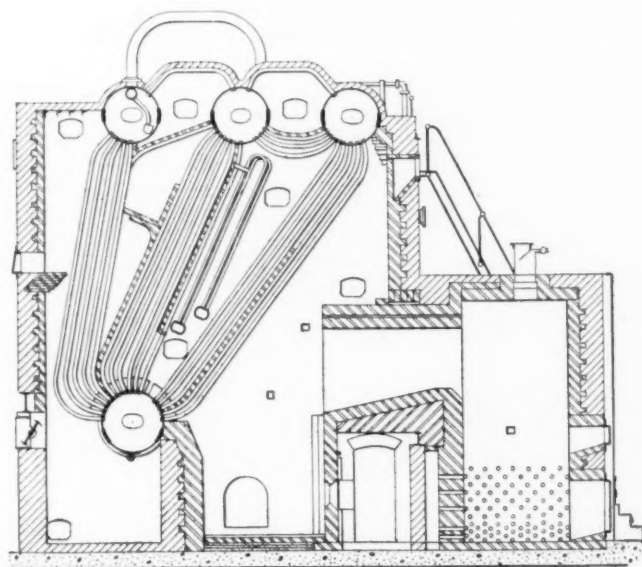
STIRLING BOILER FITTED WITH HEARTH-TYPE FURNACE ARRANGED FOR SUPPLEMENTARY OIL BURNING WITH MECHANICAL BURNERS
